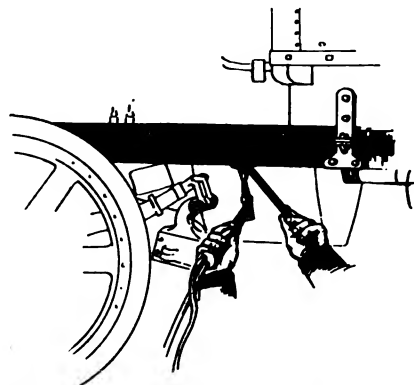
A TYPICAL OVERHEAD WELDING JOB WHICH REQUIRES SPECIAL CARE AND SKILL
